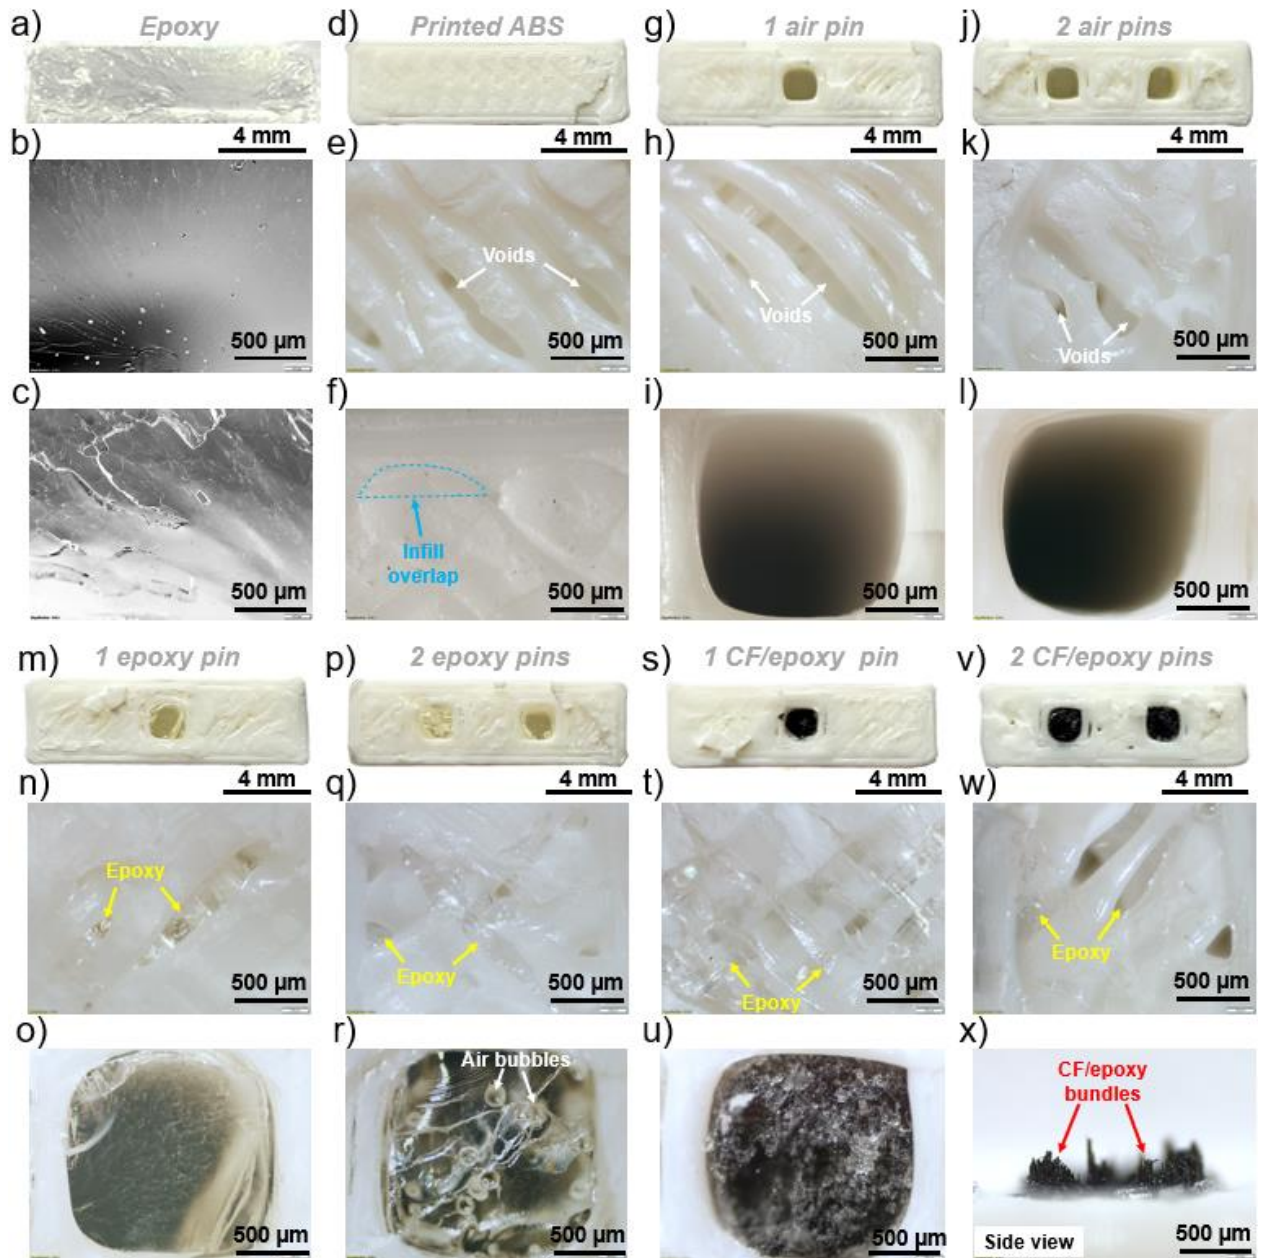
Fracture surfaces of different tensile samples at different magnifications: (a, b, c) molded epoxy samples; (d, e, f) printed ABS samples; (g, h, i) 1 air pin samples; (j, k, l) 2 air pin samples; (m, n, o) 1 epoxy pin samples ; (p, q, r) 2 epoxy pin samples ; (s, t, u) 1 CF/epoxy samples ; (v, w, x) 2 CF/epoxy pin samples
